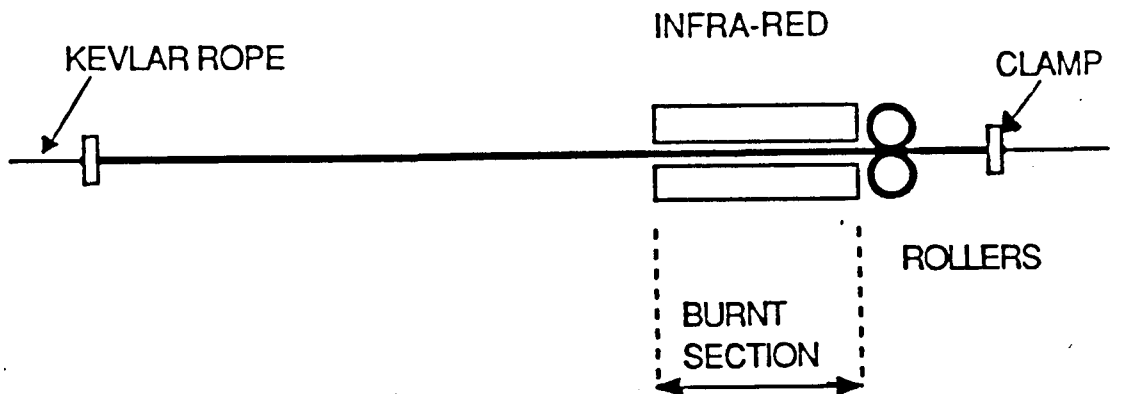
Discontinuous pultrusion technique used to produce sections using 2m lengths of APC2 precursor material.
